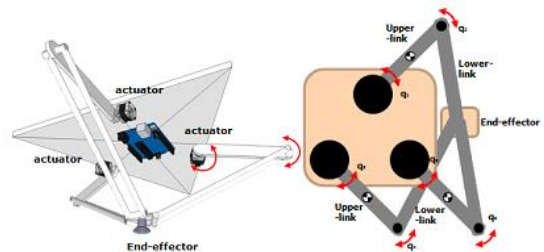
The Parts of parallel robot (left) and configuration (right)
